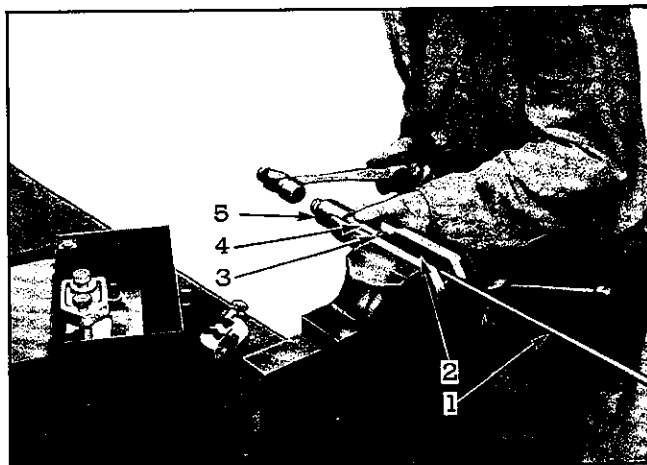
Flaring Tubing with Tool Supported in Vise.
